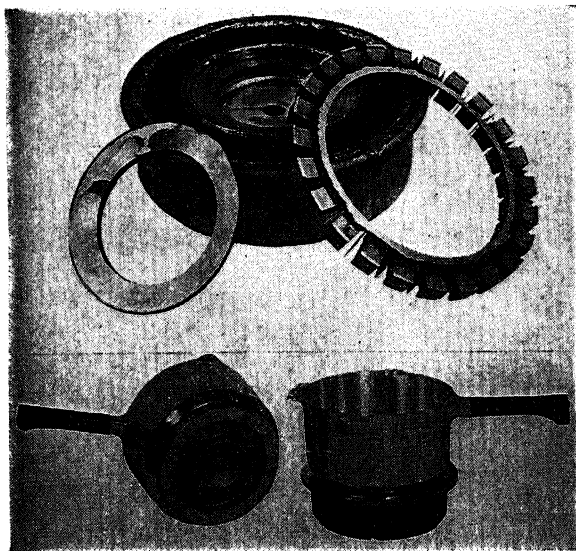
New type of electric cooking unit operating by induction rather than resistance. Arc welding makes its construction practical.
